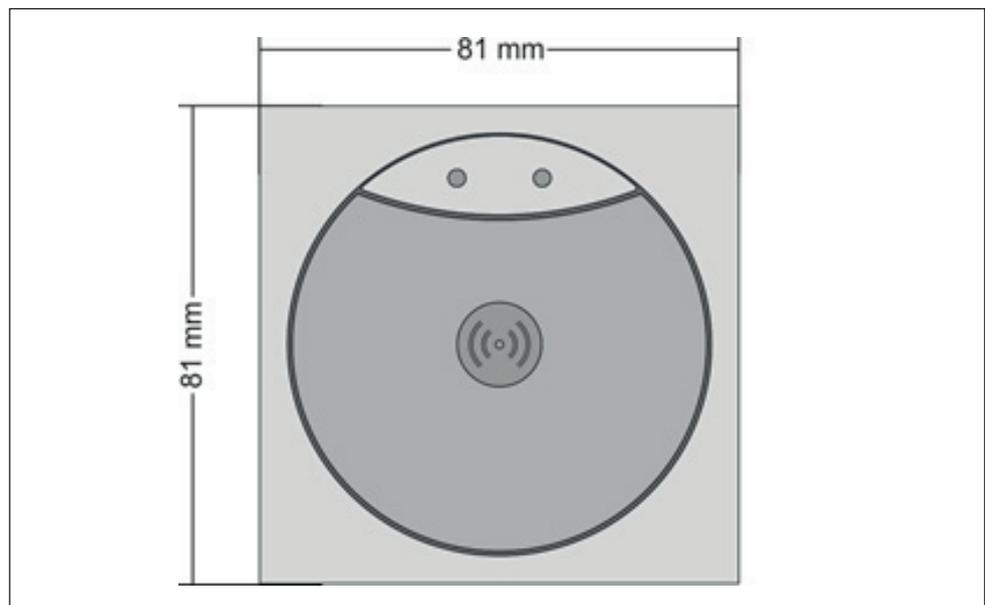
Dimension sheet of WT 210 / WT 210 BLE with frame
